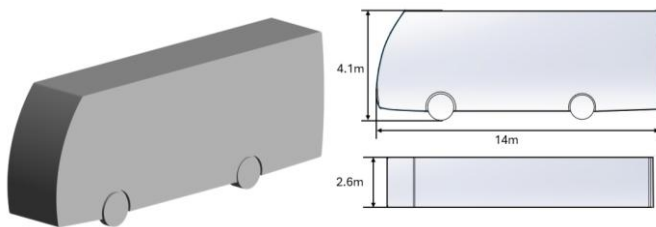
Orthogonal views of the double-decker bus with dimensions
